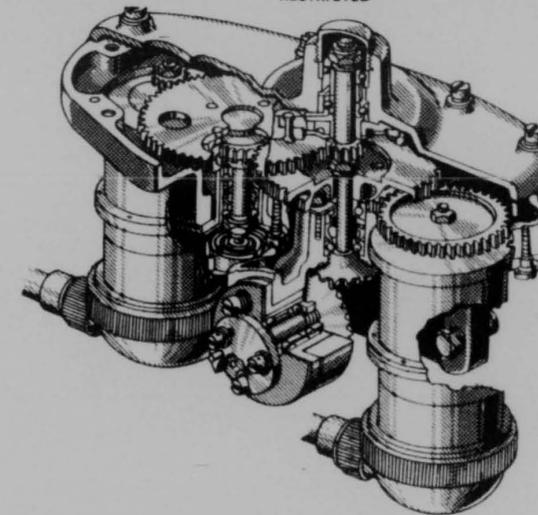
Elevation Selsyn Units, Showing Gears, Shafts, and Bearings.
